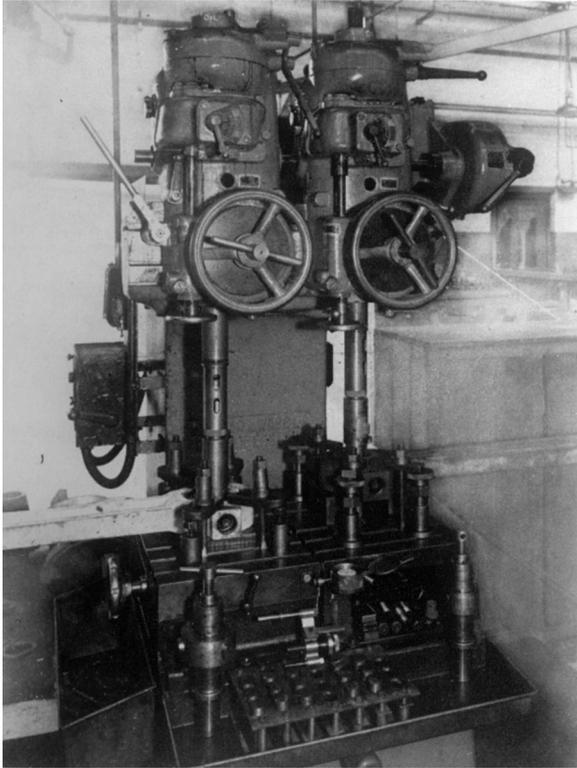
Twin spindle drilling machine converted for rod bore and bush boring.
